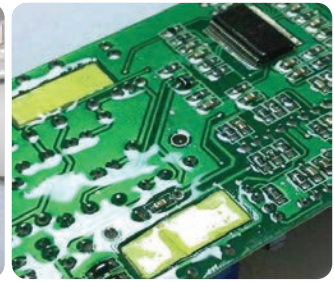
Fully automatic coating machine Figure 2 Coated circuit board
